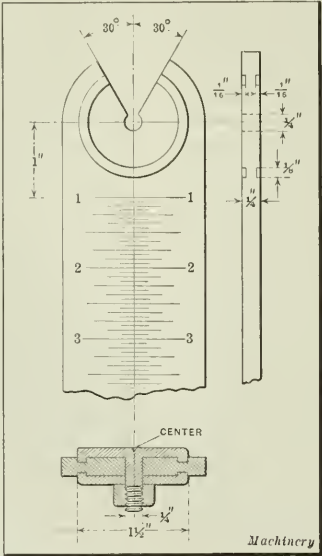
Plan and Cross-section of Radius Arm Hinge
